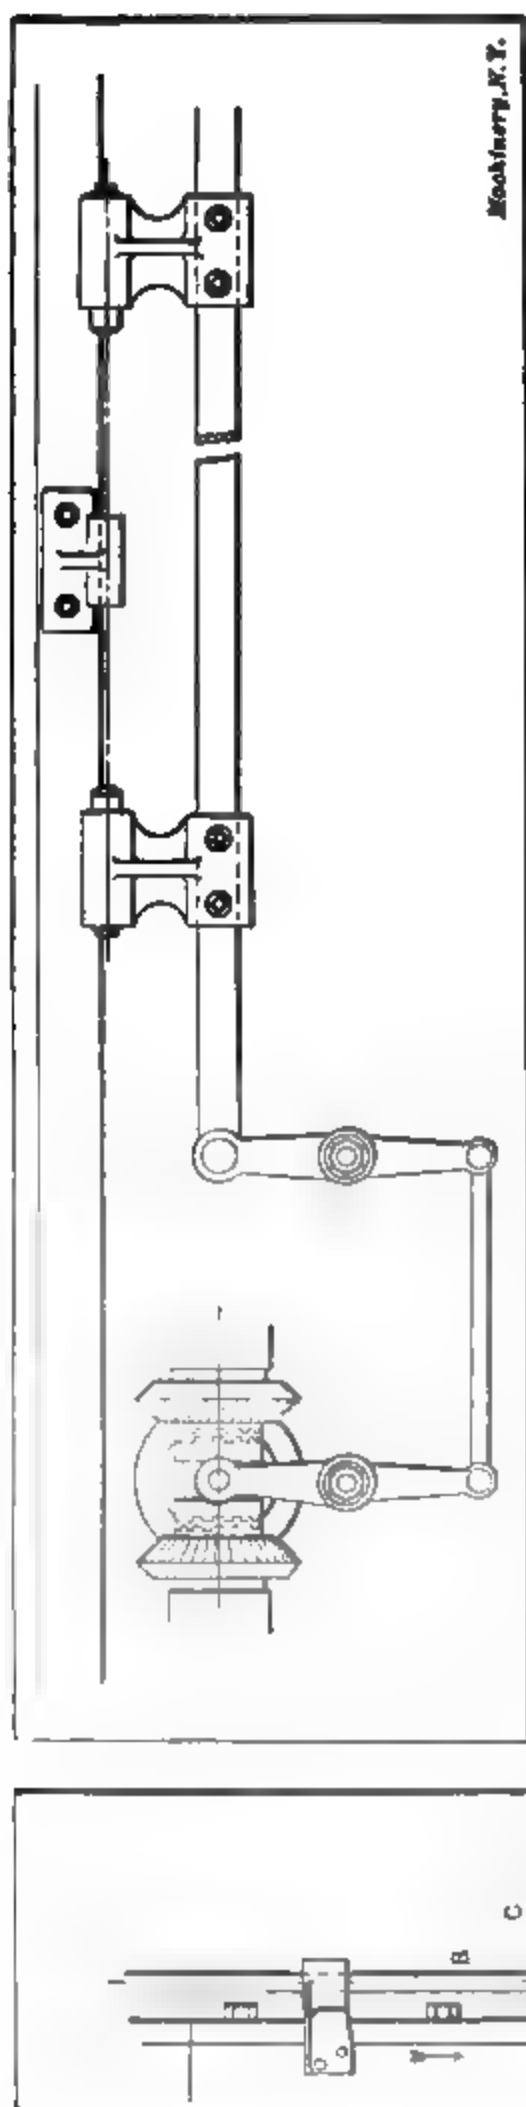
Double Trip and Reversing Clutch for Grinding Machine
